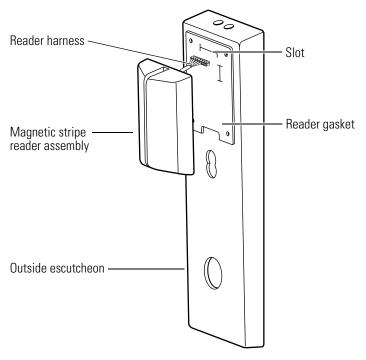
Positioning the B.A.S.I.S. magnetic stripe reader assembly
